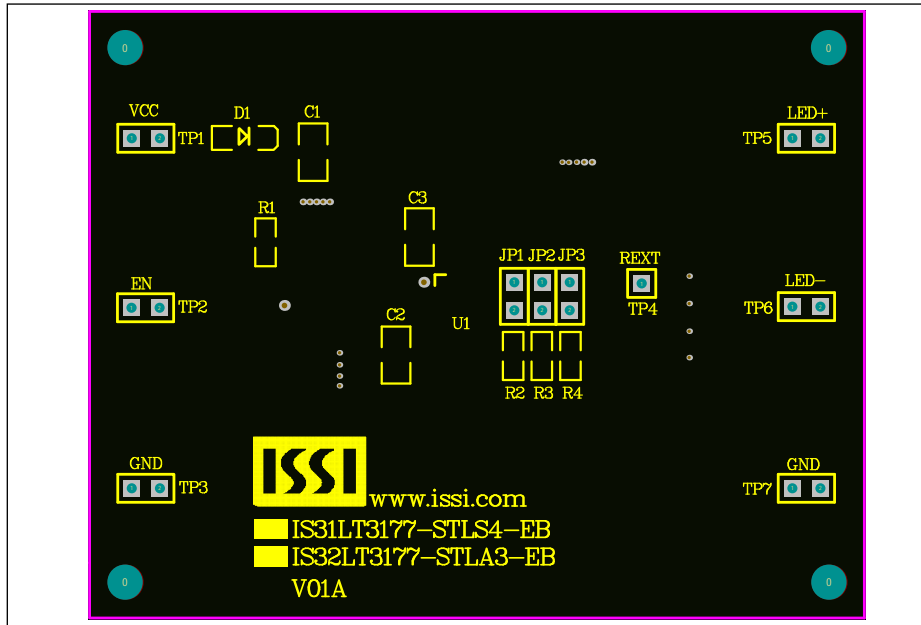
Board Component Placement Guide - Top Layer (SOT23-6)
